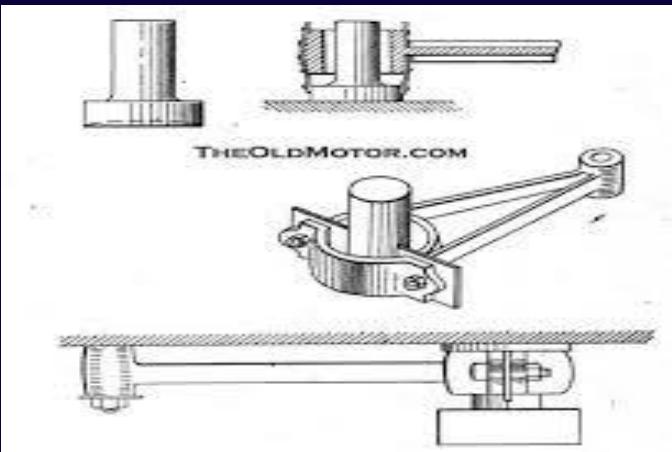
Simple "Set Up" For Pouring Big End Bearings. A Babbittting Mandrel is Used
